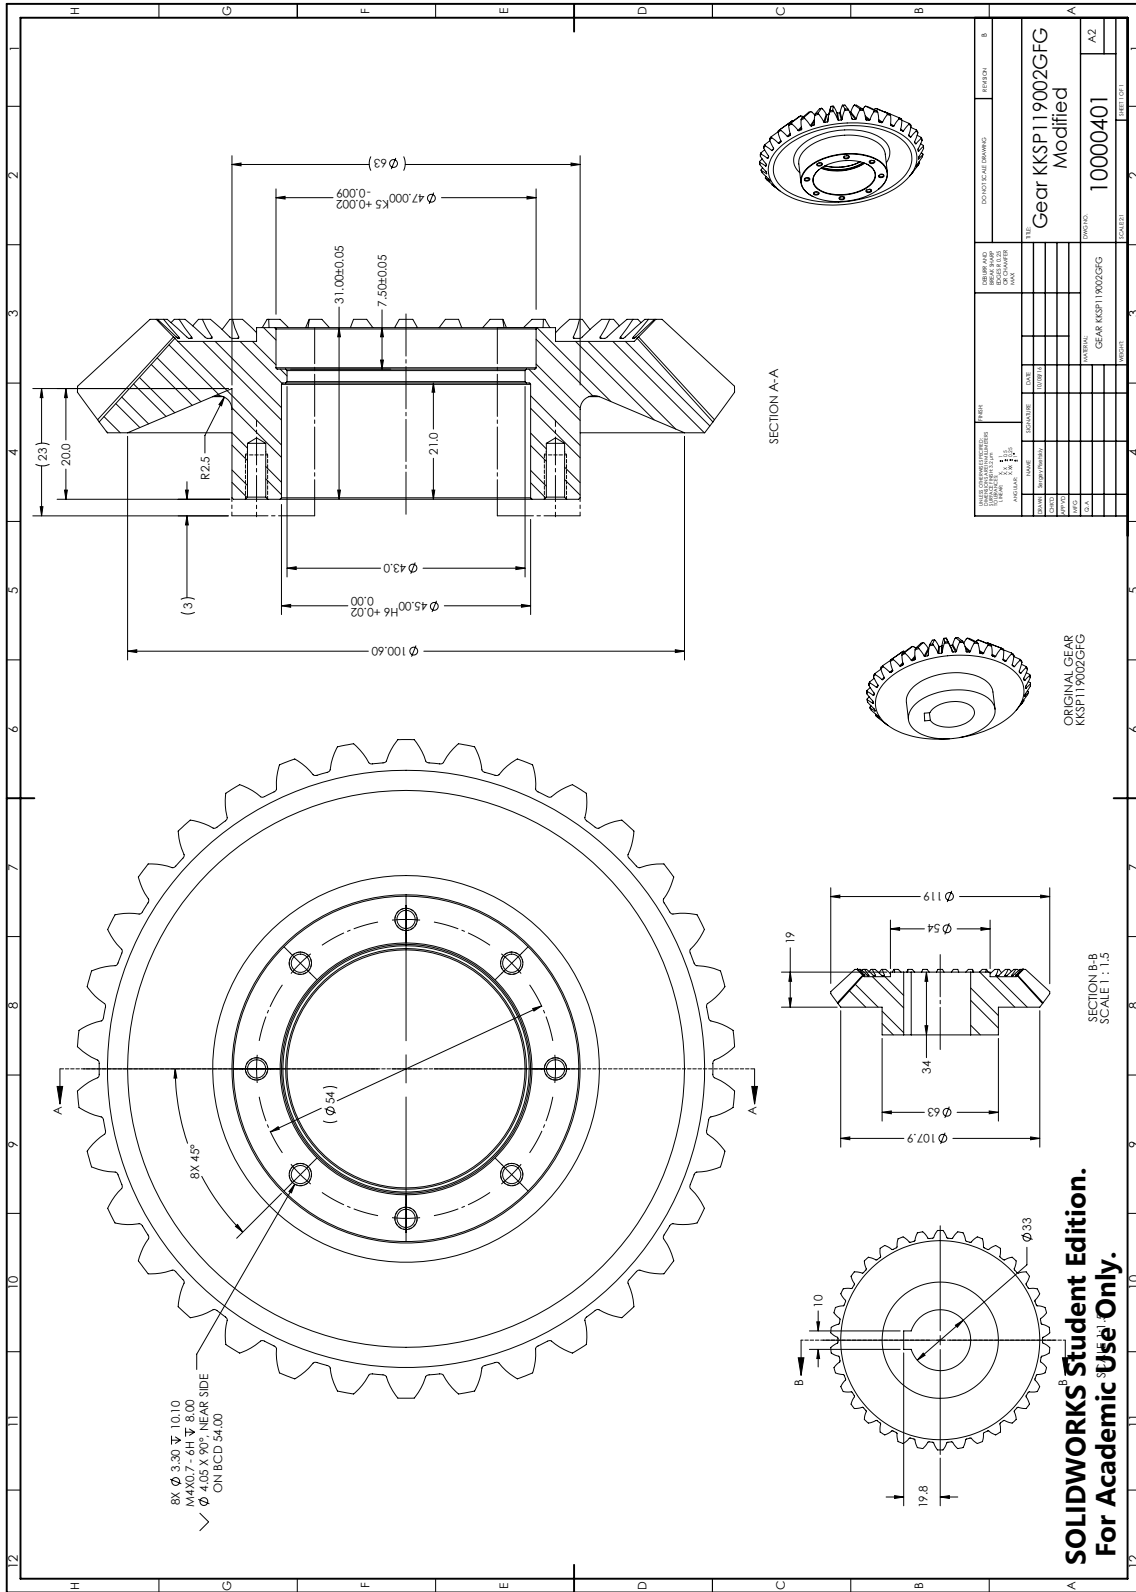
Drawing: Bevel gear KKSP119002GF-G modified.
